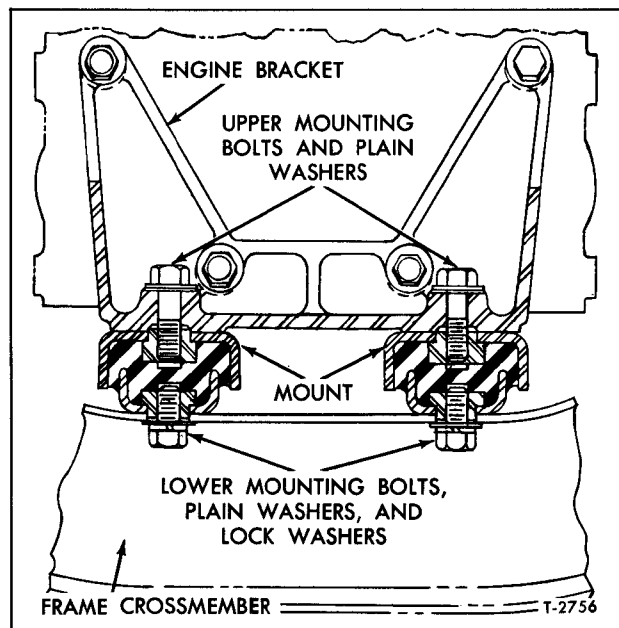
Engine Front Mounting on Conv. Cab Models (6V-53 Engine)
